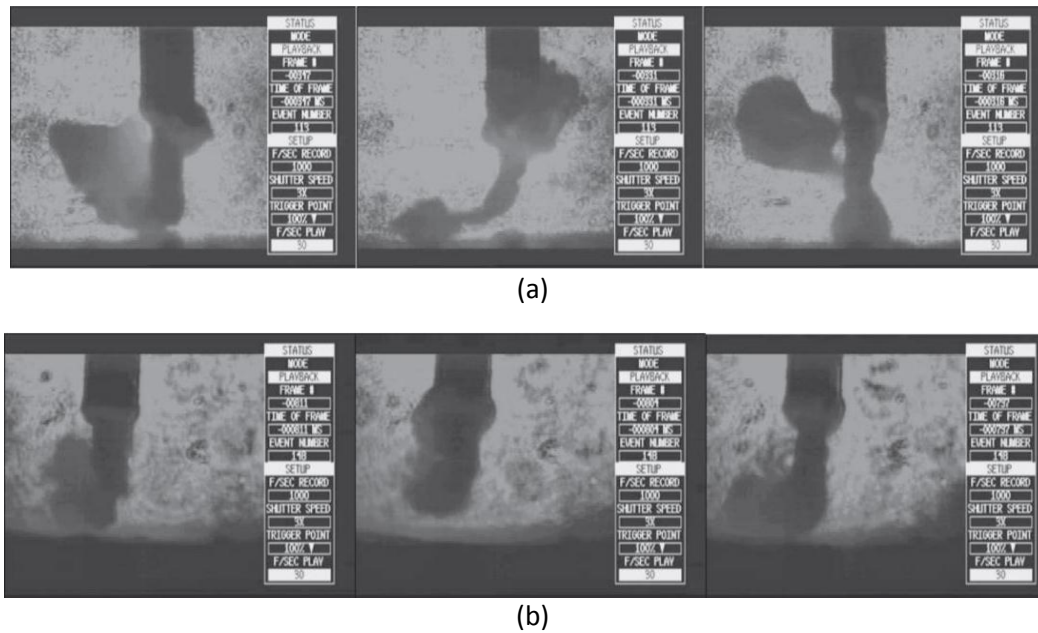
Image sequence captured during metal transfer of a rutile wire for a current around 200 A. (a) Welding with 100% CO₂ (b) Welding with 75% Ar-25% CO₂ [2]
